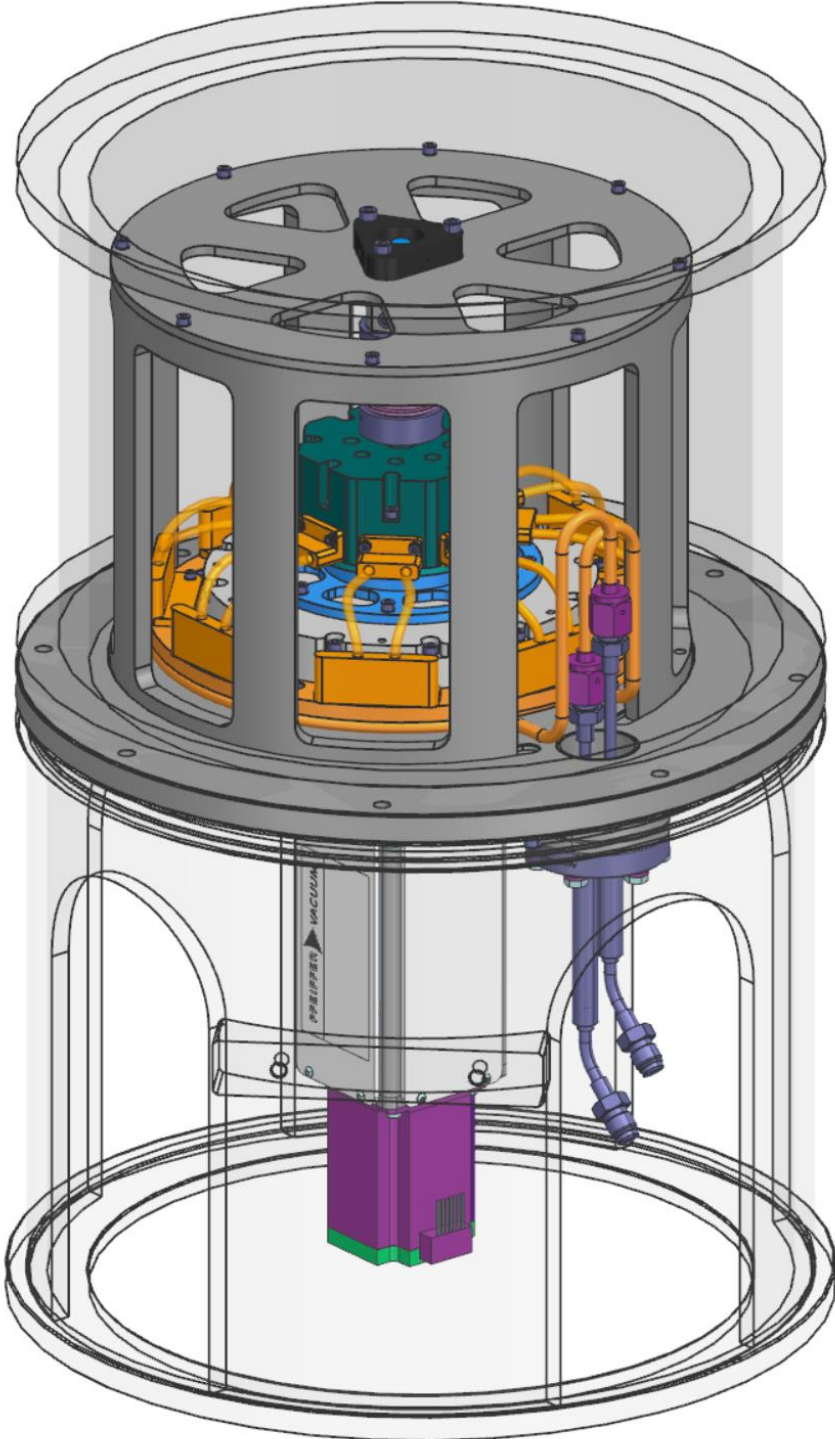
Testing rig top level assembly with installed measuring assembly for the smallest possible bearing.
